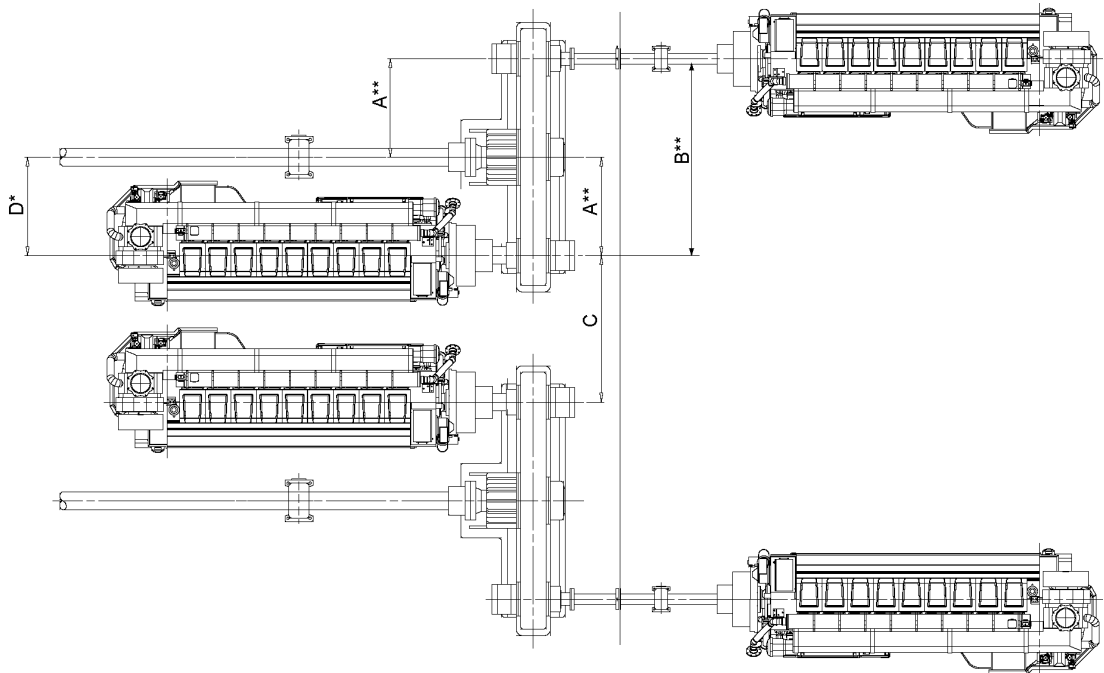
Main engine arrangement, in-line engines (DAAE086972B)
